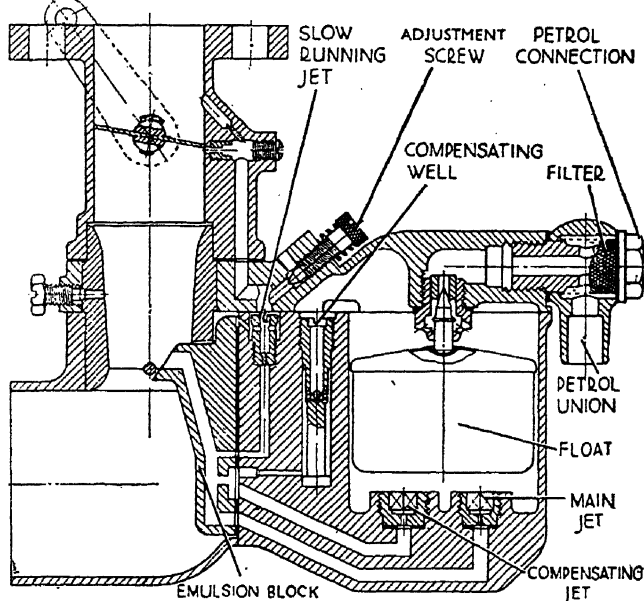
Sectional view of Zenith V-type Carburettor.
